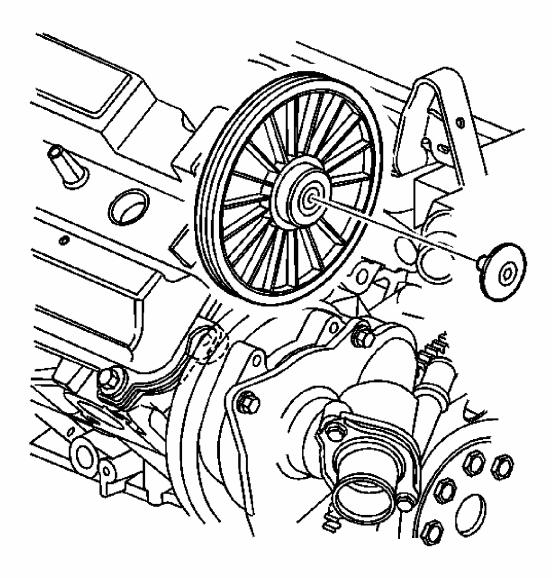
Identifying Intake Camshaft End Cap Courtesy of GENERAL MOTORS CORP.
